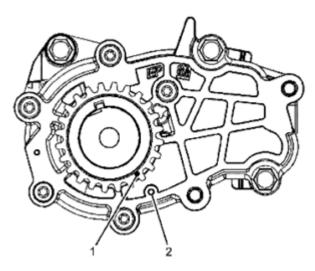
Aligning Mark Crankshaft Timing Sprocket And On Oil Pump Courtesy of SUZUKI OF AMERICA CORP.
